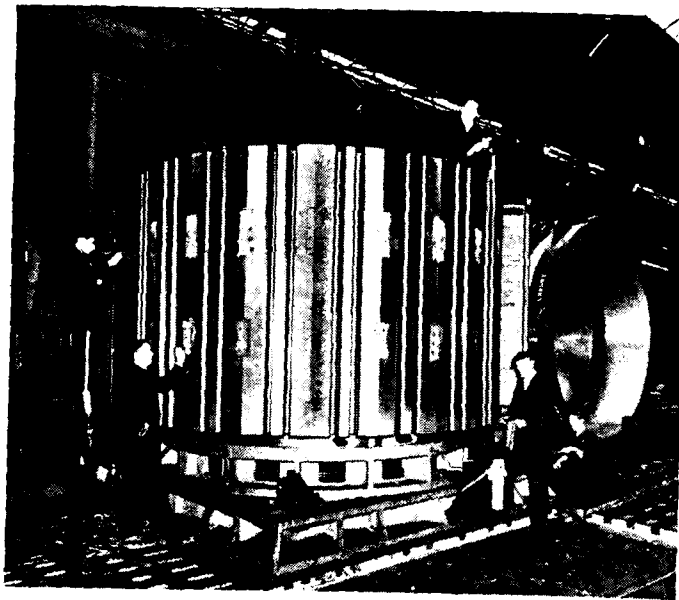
Rotor for the Kemano alternator during machining in the works
